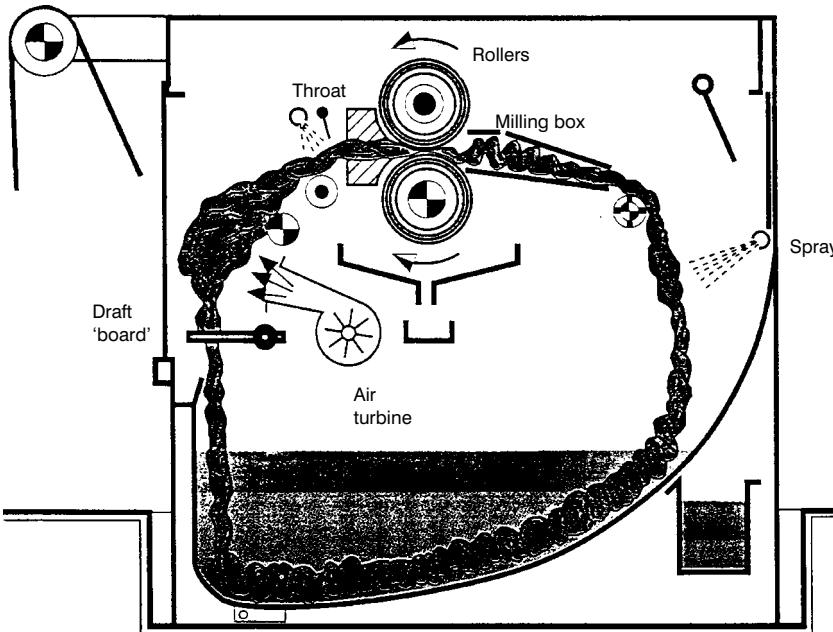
Schematic diagram of a rotary milling machine (example is M-Tec CMS 200)
